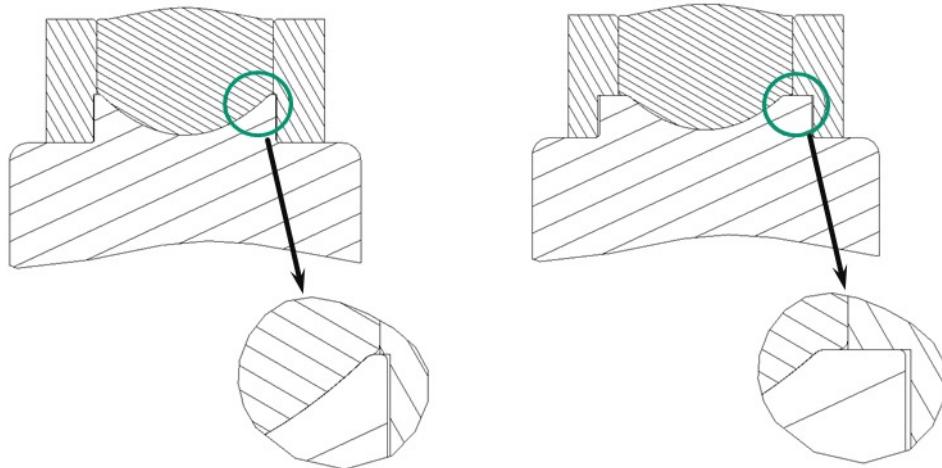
Design Impact on Tooling: Sharp Edge Condition (left) and Robust Tooling Design (right)
